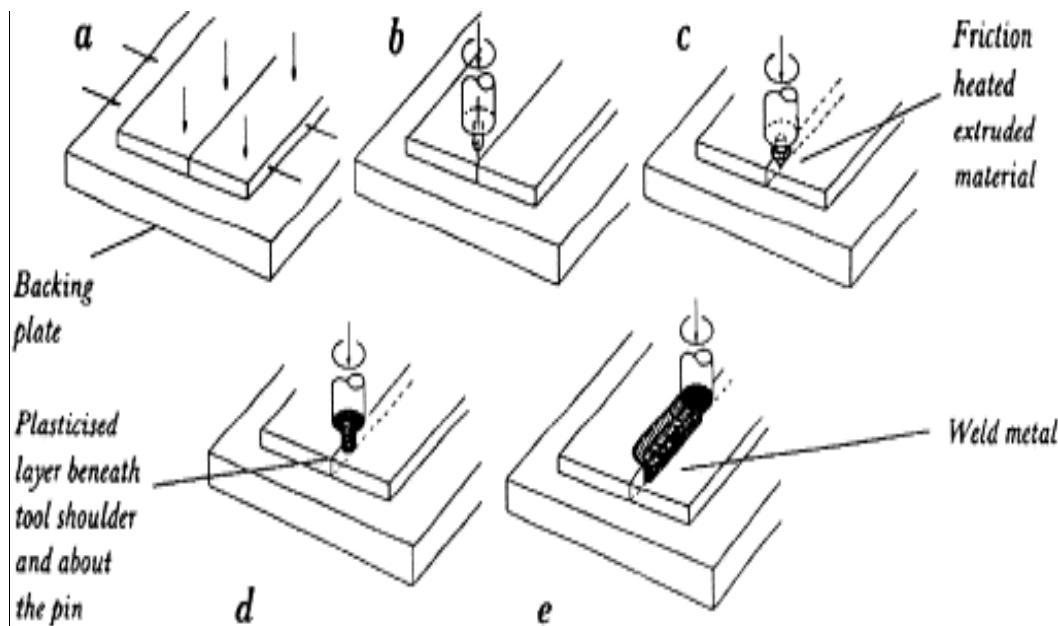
Friction Stir Welding schematic [1]
